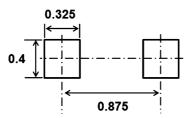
Land Pattern Dimensions (Unit: mm)
